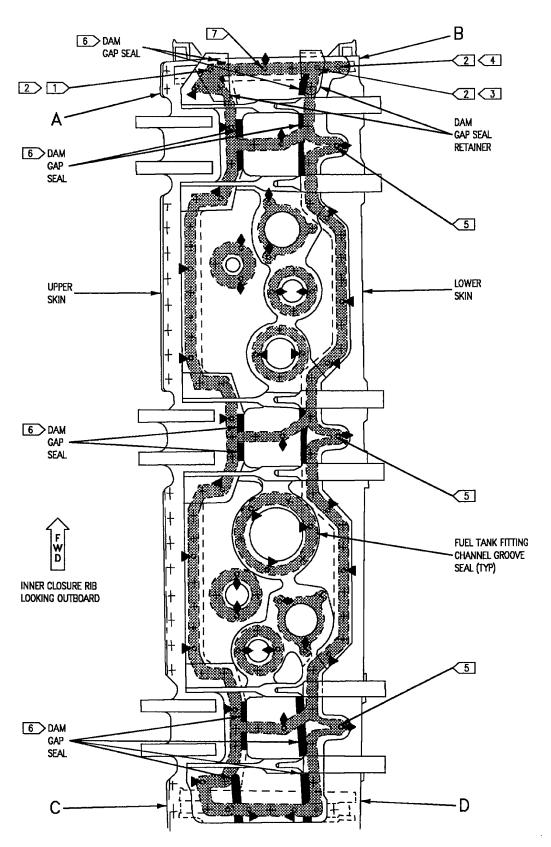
Closure Rib Channel Groove Seal Injection (Sheet 1)
